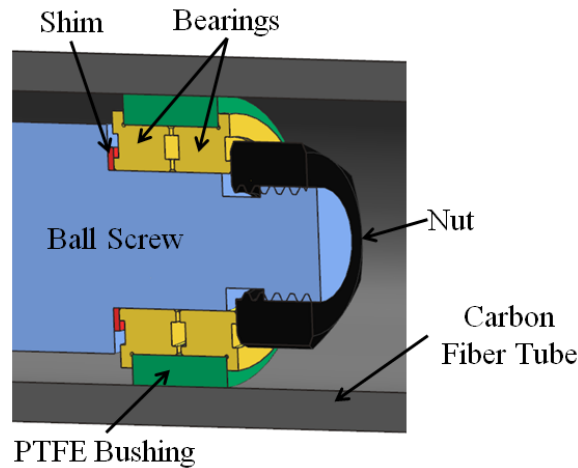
Section view of anti-tipping PTFE bushing attached to the end of the ball screw.
